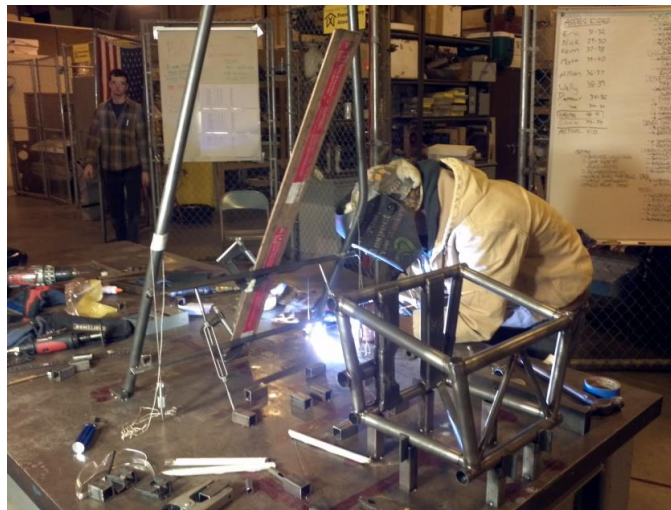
Welding in the longitudinal members. The completed rear box can be seen.
